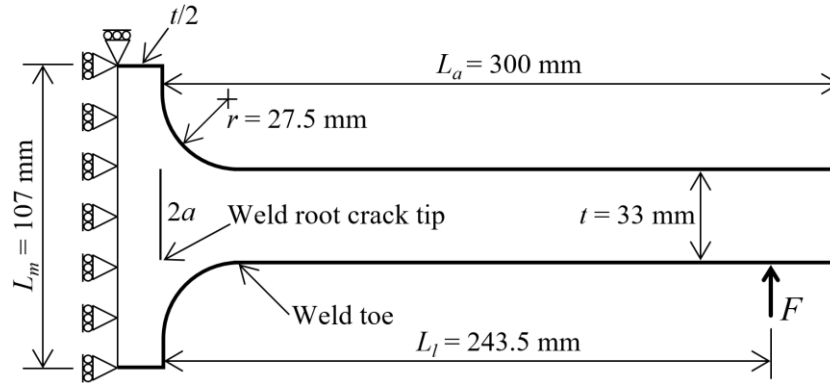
2D symmetry model of a load-carrying cruciform fillet welded joint loaded under three-point bending
